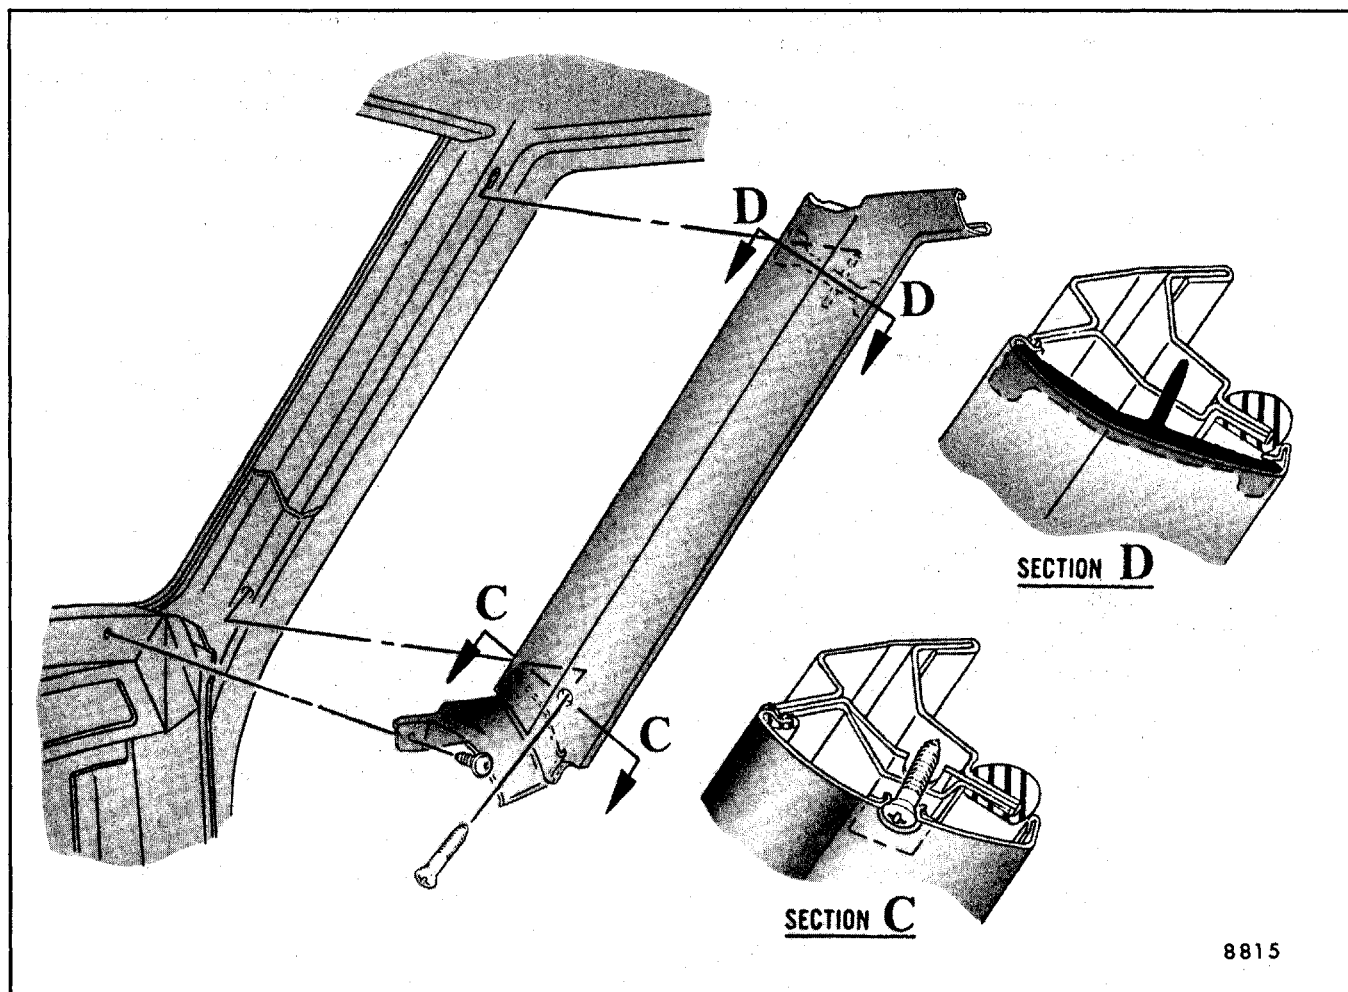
Windshield Side Garnish Molding - "K" Styles
